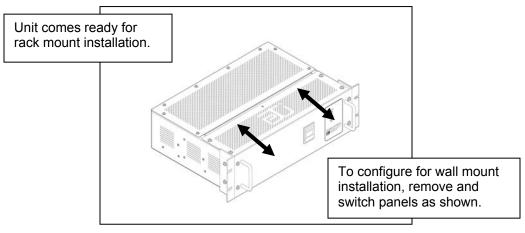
SWITCHING PANELS FOR INSTALLATION.
